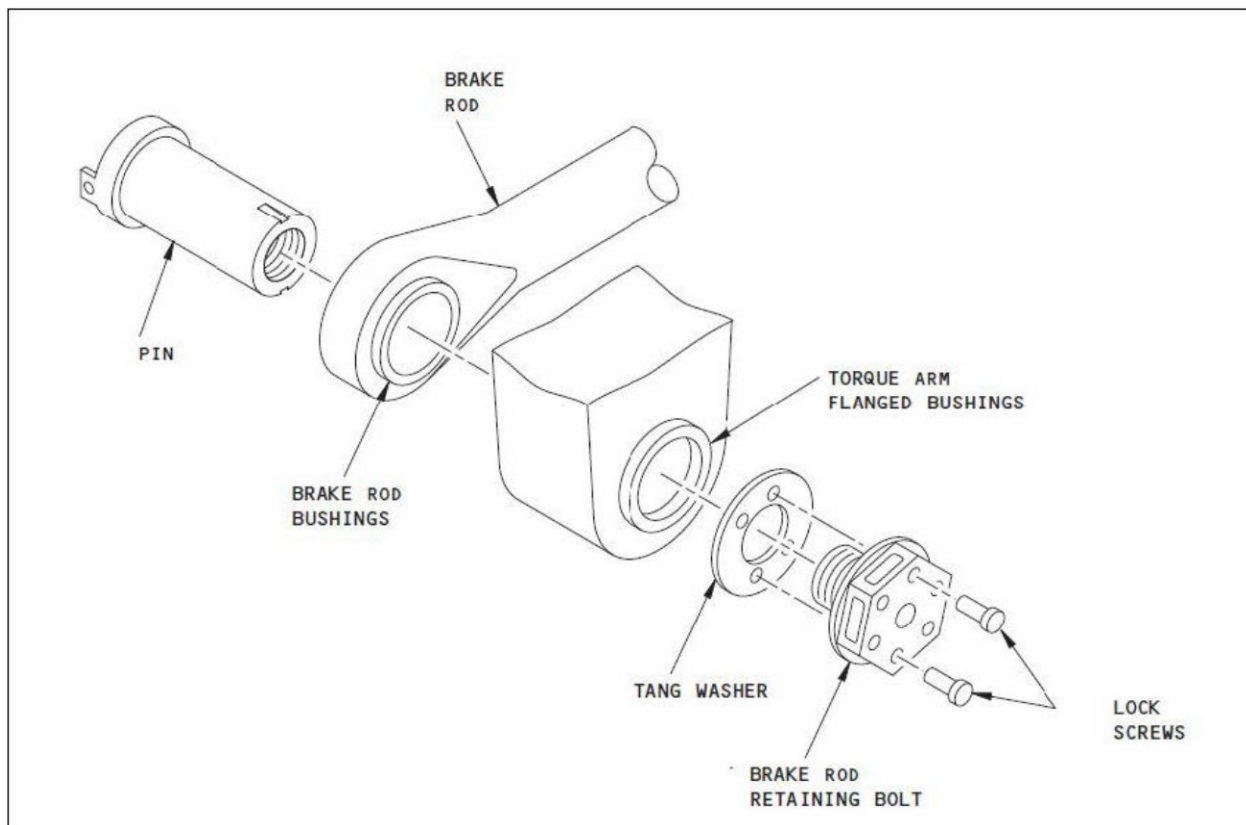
Brake rod attaching hardware. (Copyright © Boeing. Reproduced with permission.)
